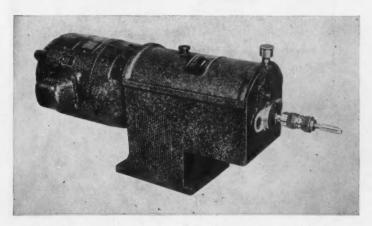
Lead-screw tapping unit will be exhibited by Ettco Tool Co., Inc.
